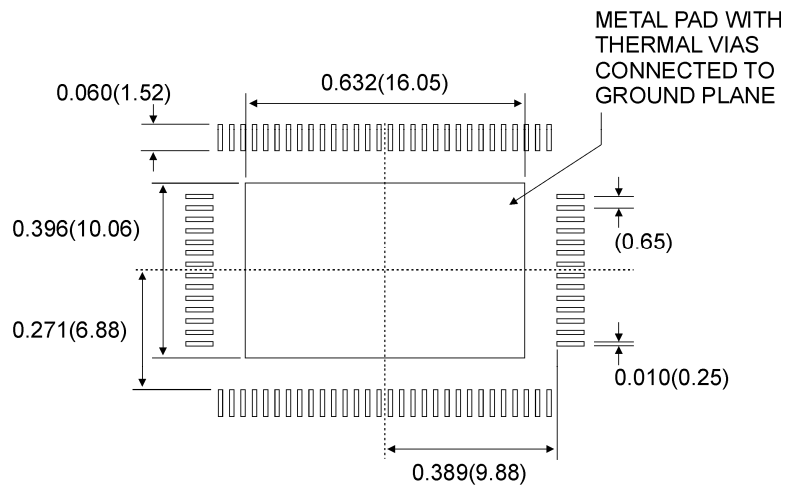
RDA012M4MS-QP package, dimensions shown in inches (mm).
